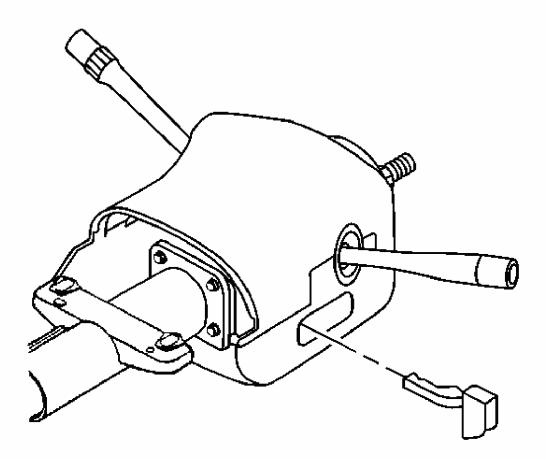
Removing/Installing Tilt Lever Courtesy of GENERAL MOTORS CORP.
